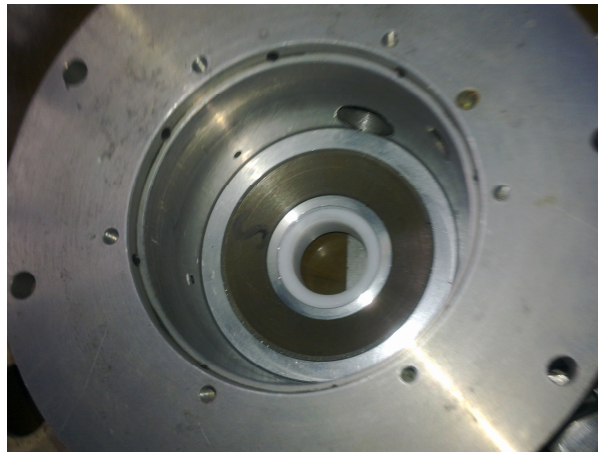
The stator(bottom) of the permanent maglev turbine machine.
